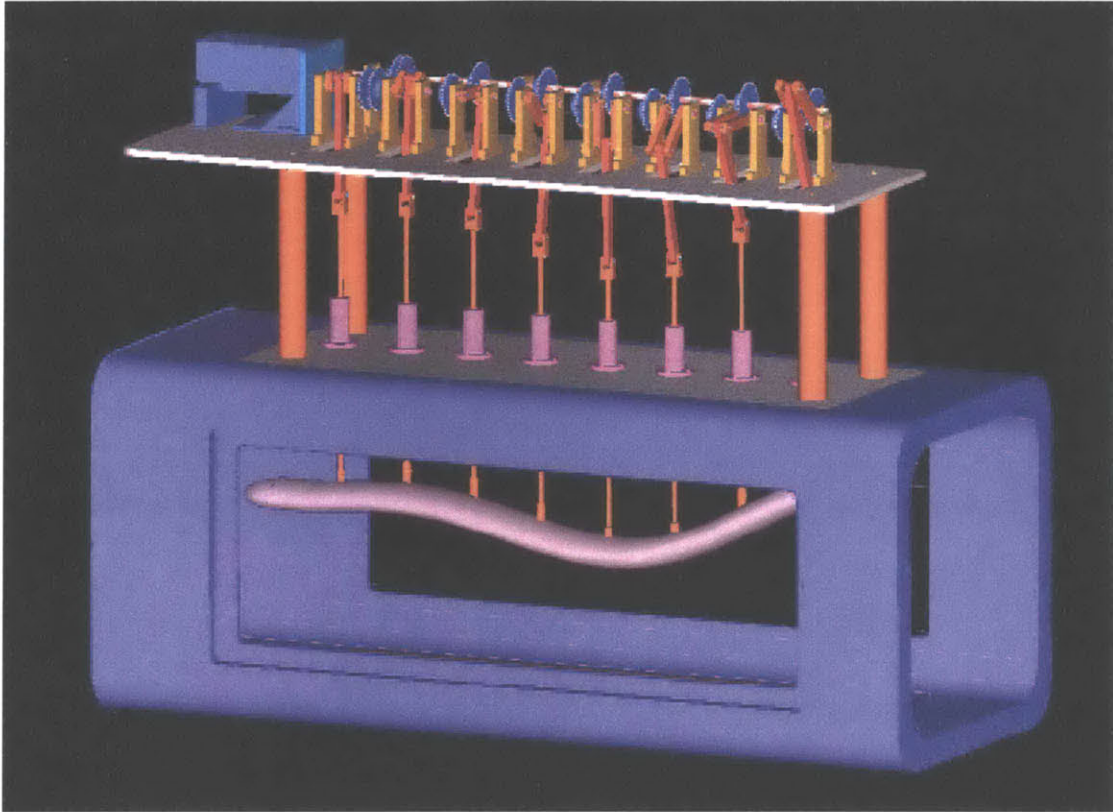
Isometric view of the molded, flexible polyurethane sea snake attached to the waving plate mechanism.
